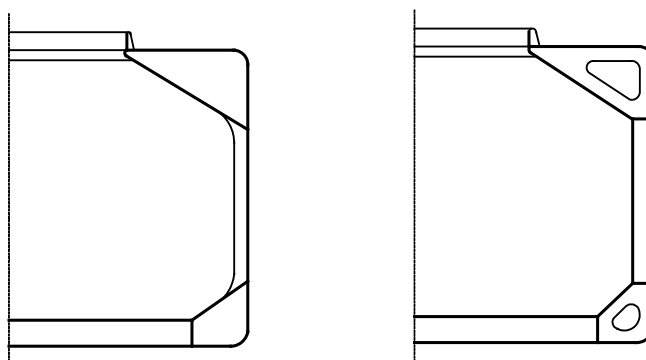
Typical midship sections of oil//bulk/ore carriers
